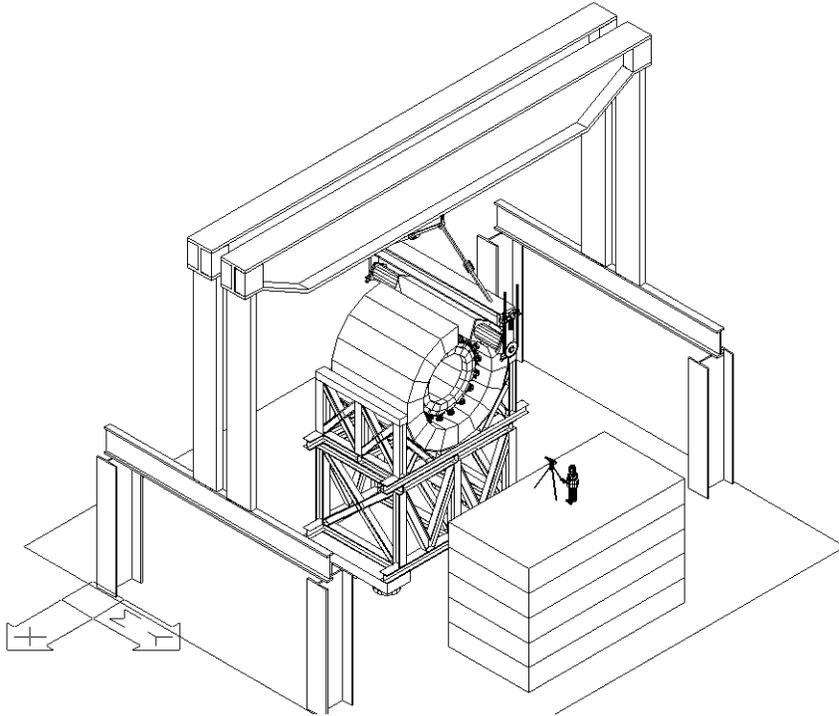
CMS HCAL barrel assembly / installation step 6.
